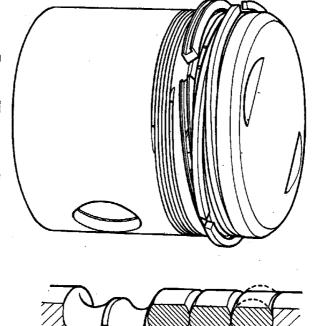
WIREWOUND CLOSE-FITTING PISTON.
